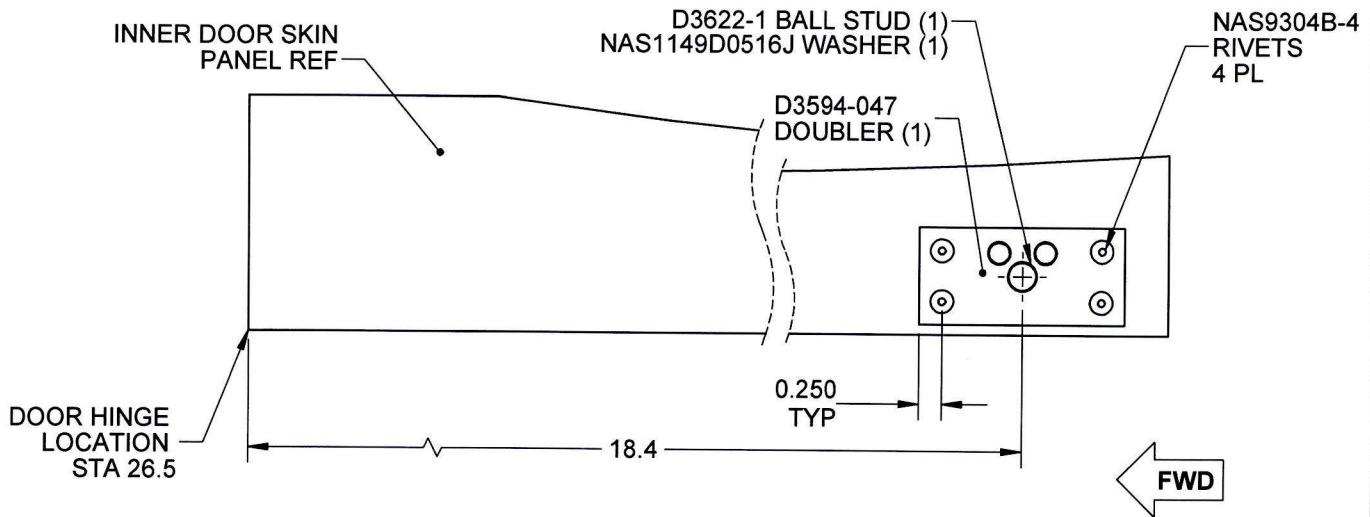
INSTALLATION OF D3594-047 DOOR DOUBLER
